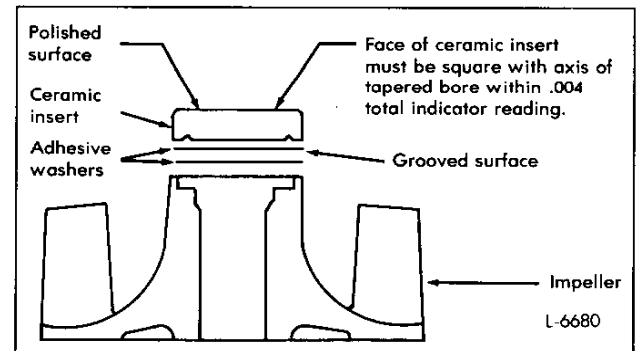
Insert, Adhesive Washer, Impeller Stackup
